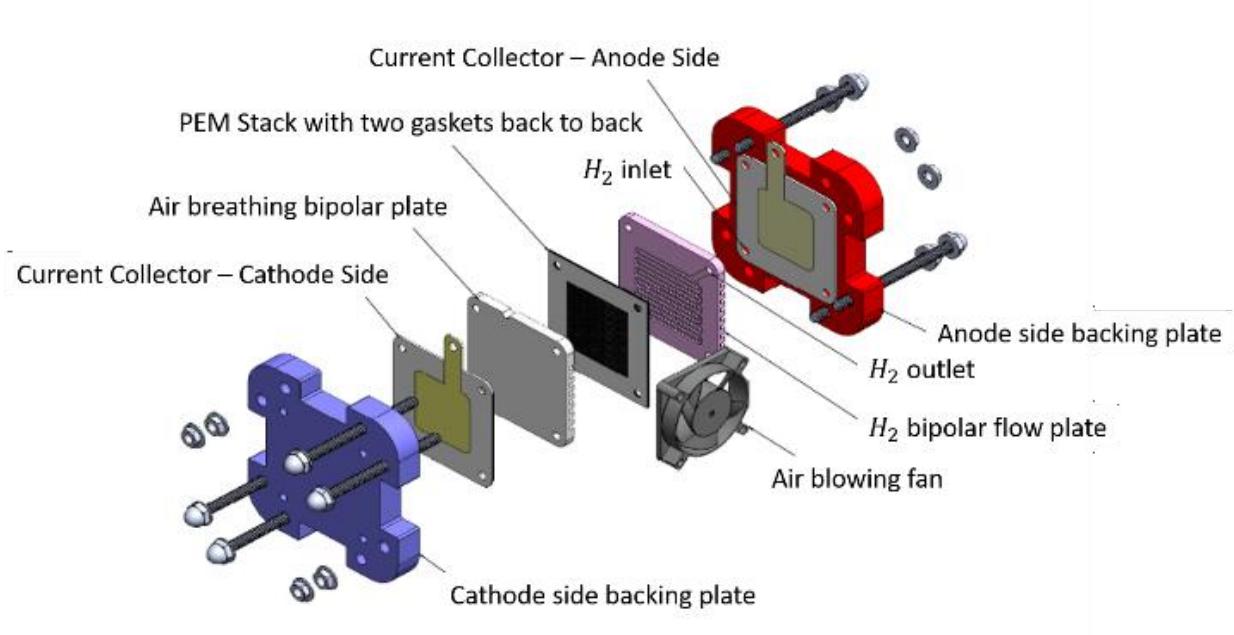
Exploded view of a Proton Exchange Membrane fuel cell.
